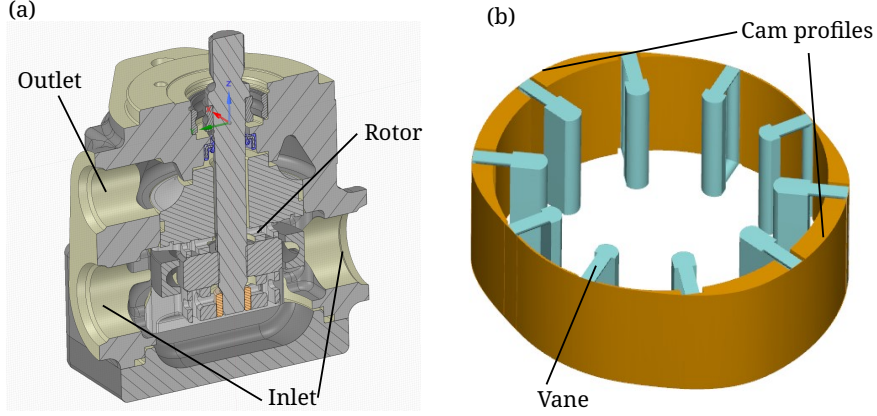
(a) Cross section of vane pump assembly. (b) Fluid volume enclosed in the rotor chamber
